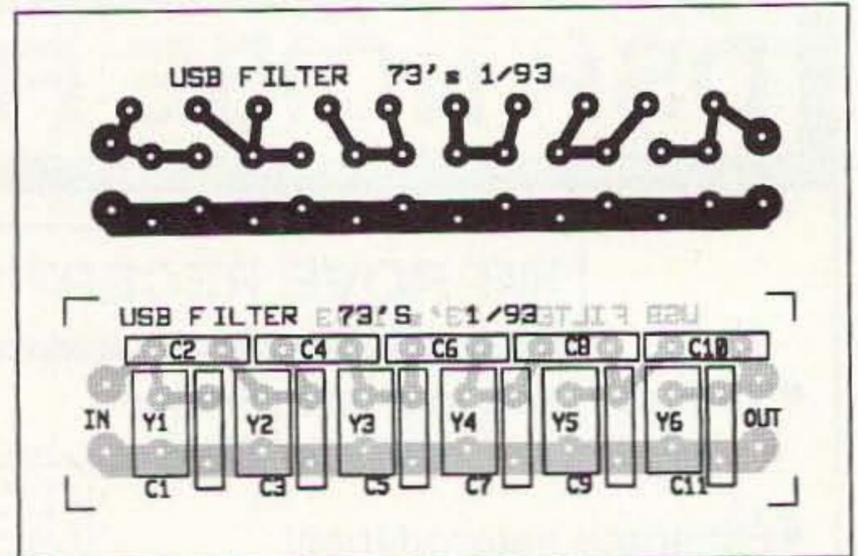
(a). PC board foil pattern for the upper sideband filter. (b). Parts placement diagram.
